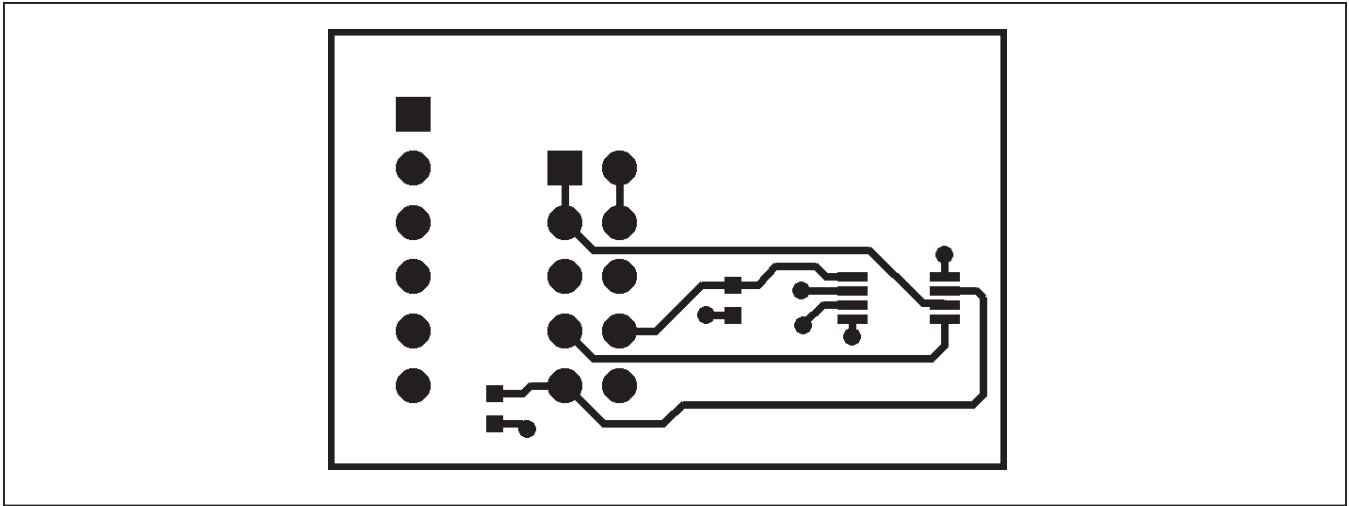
MAX31723PMB1 Peripheral Module PCB Layout—Component Side
